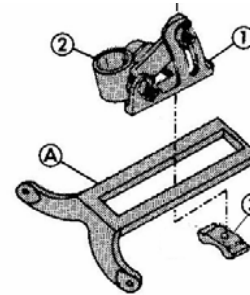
ISA Machine – Motorized Part #03-0101-M00
